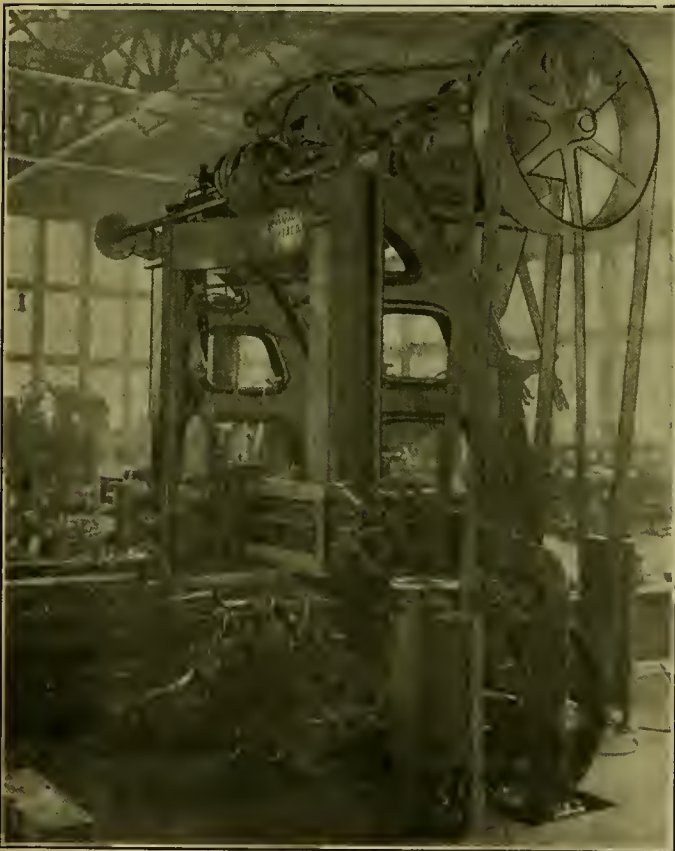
THE APPLICATION OF VARIABLE-SPEED MOTOR DRIVING TO THE 60-IN. POND PLANER, WITH SPECIAL GEAR CHANGES FOR 20 AND 30 FT. CUTTING SPEEDS.
